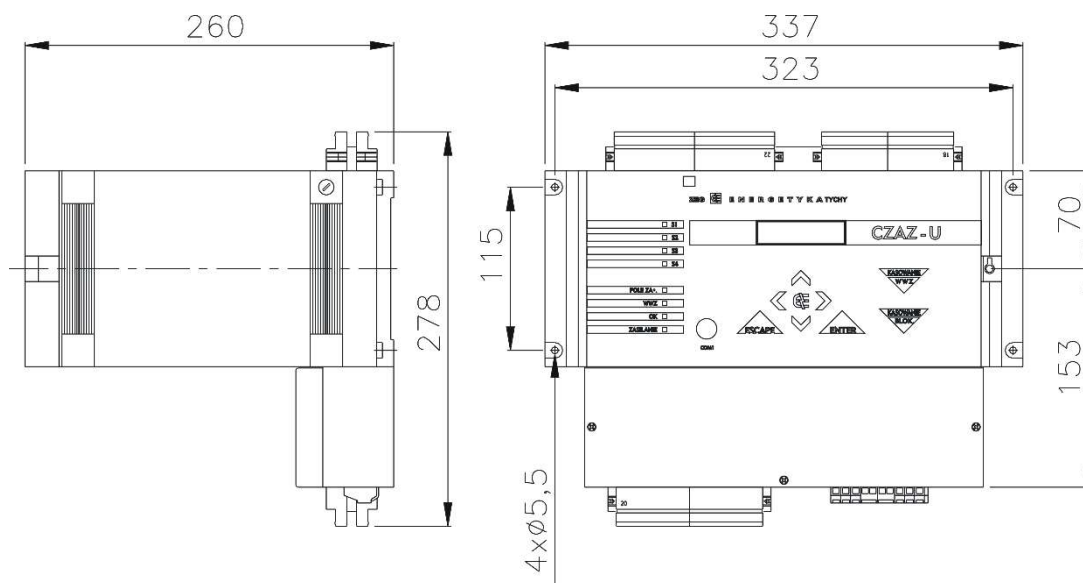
Rear and side view of the surface-mounting case – dimension drawing
